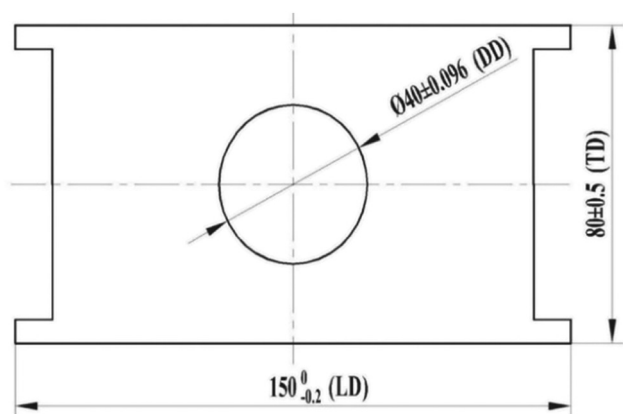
Dimension and tolerance requirements of the plate (unit: mm).
